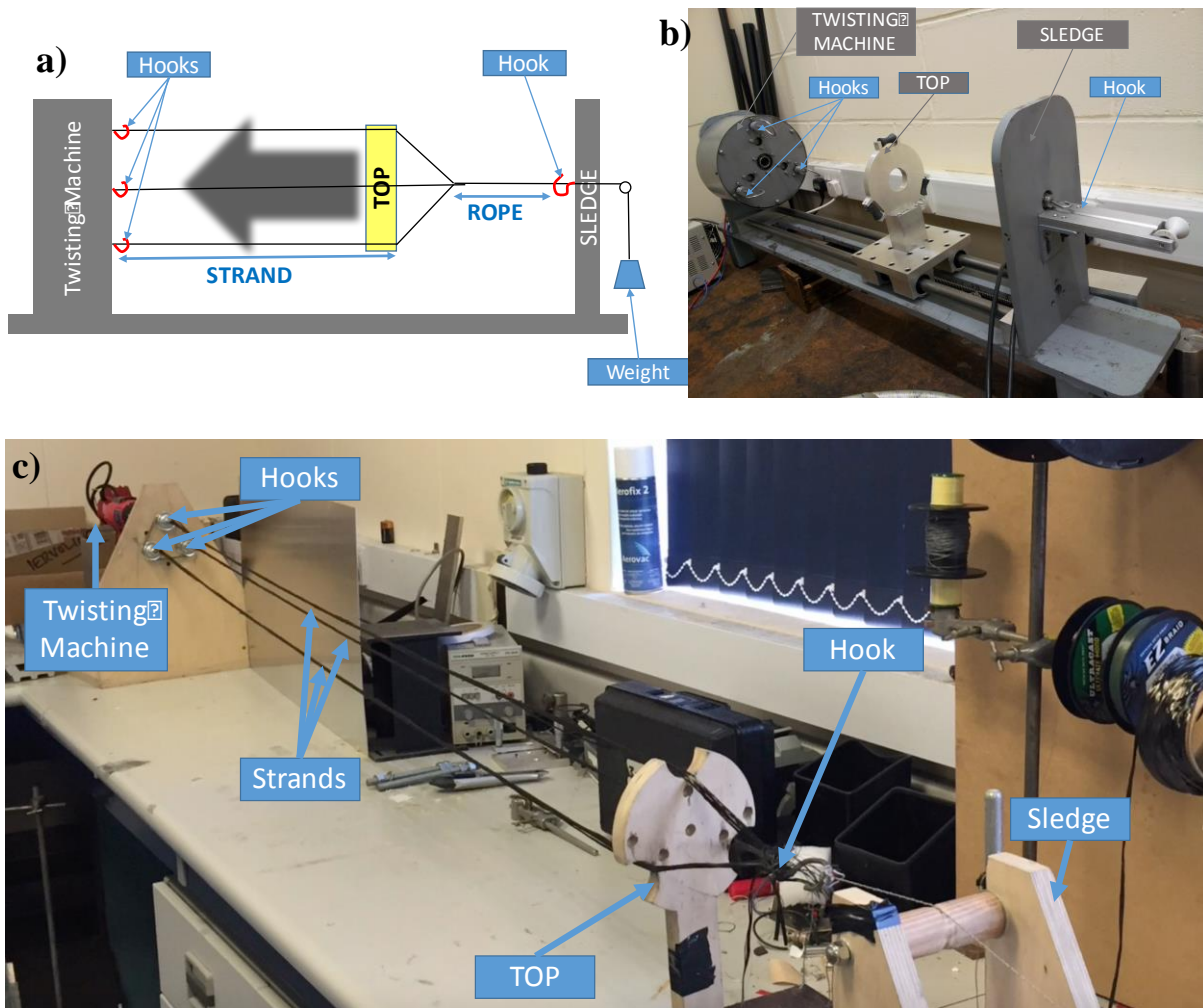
a) Schematic representation of the rope making machine; b) Metal-Rope making machine – Second Prototype; c) Wood Rope making machine – First prototype
